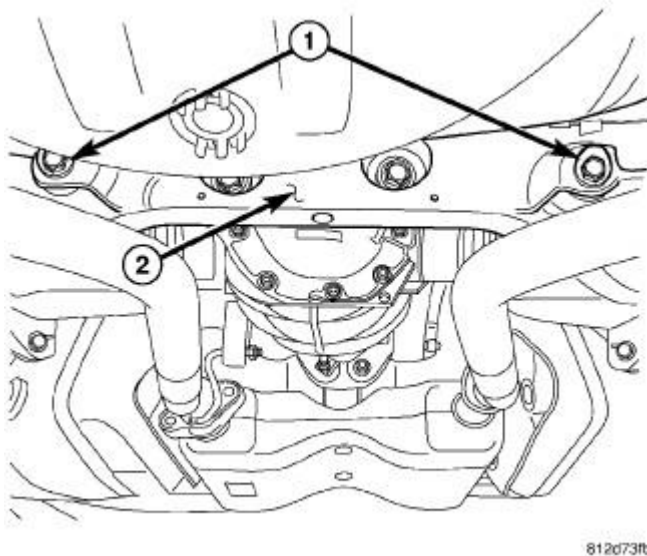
REAR TOE ADJUSTMENT BOLTS
